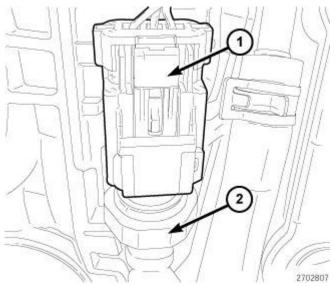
OIL PRESSURE SWITCH Courtesy of CHRYSLER LLC
